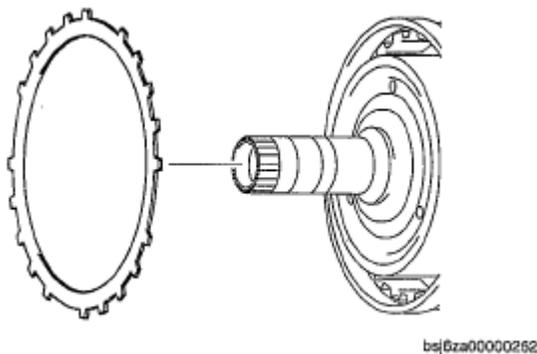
Identifying Retaining Plate On C3 Clutch Piston Component
